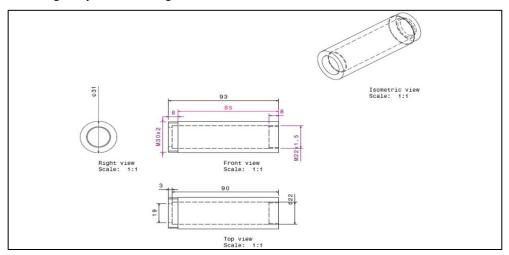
Orthographic view of the casing of stainless-steel cylinder
